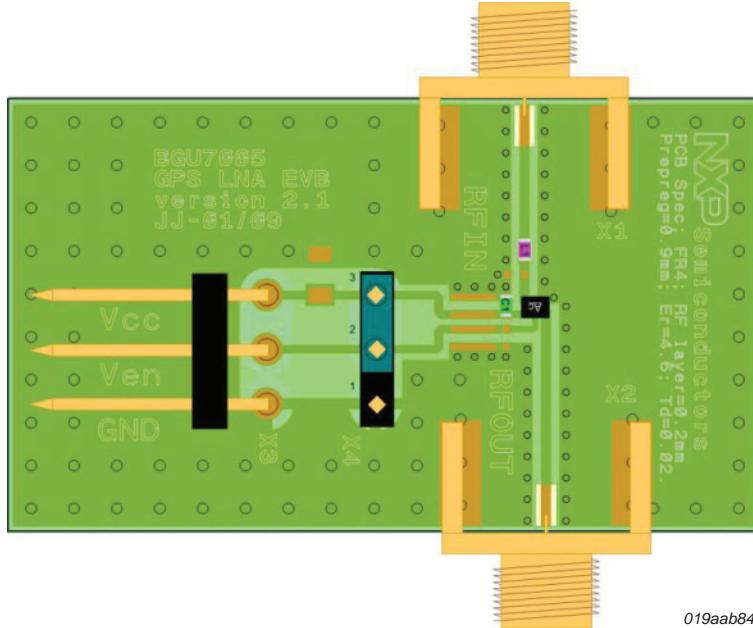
Printed circuit board lay-out of the BGU7005 (and BGU7007) GPS LNA evaluation board
